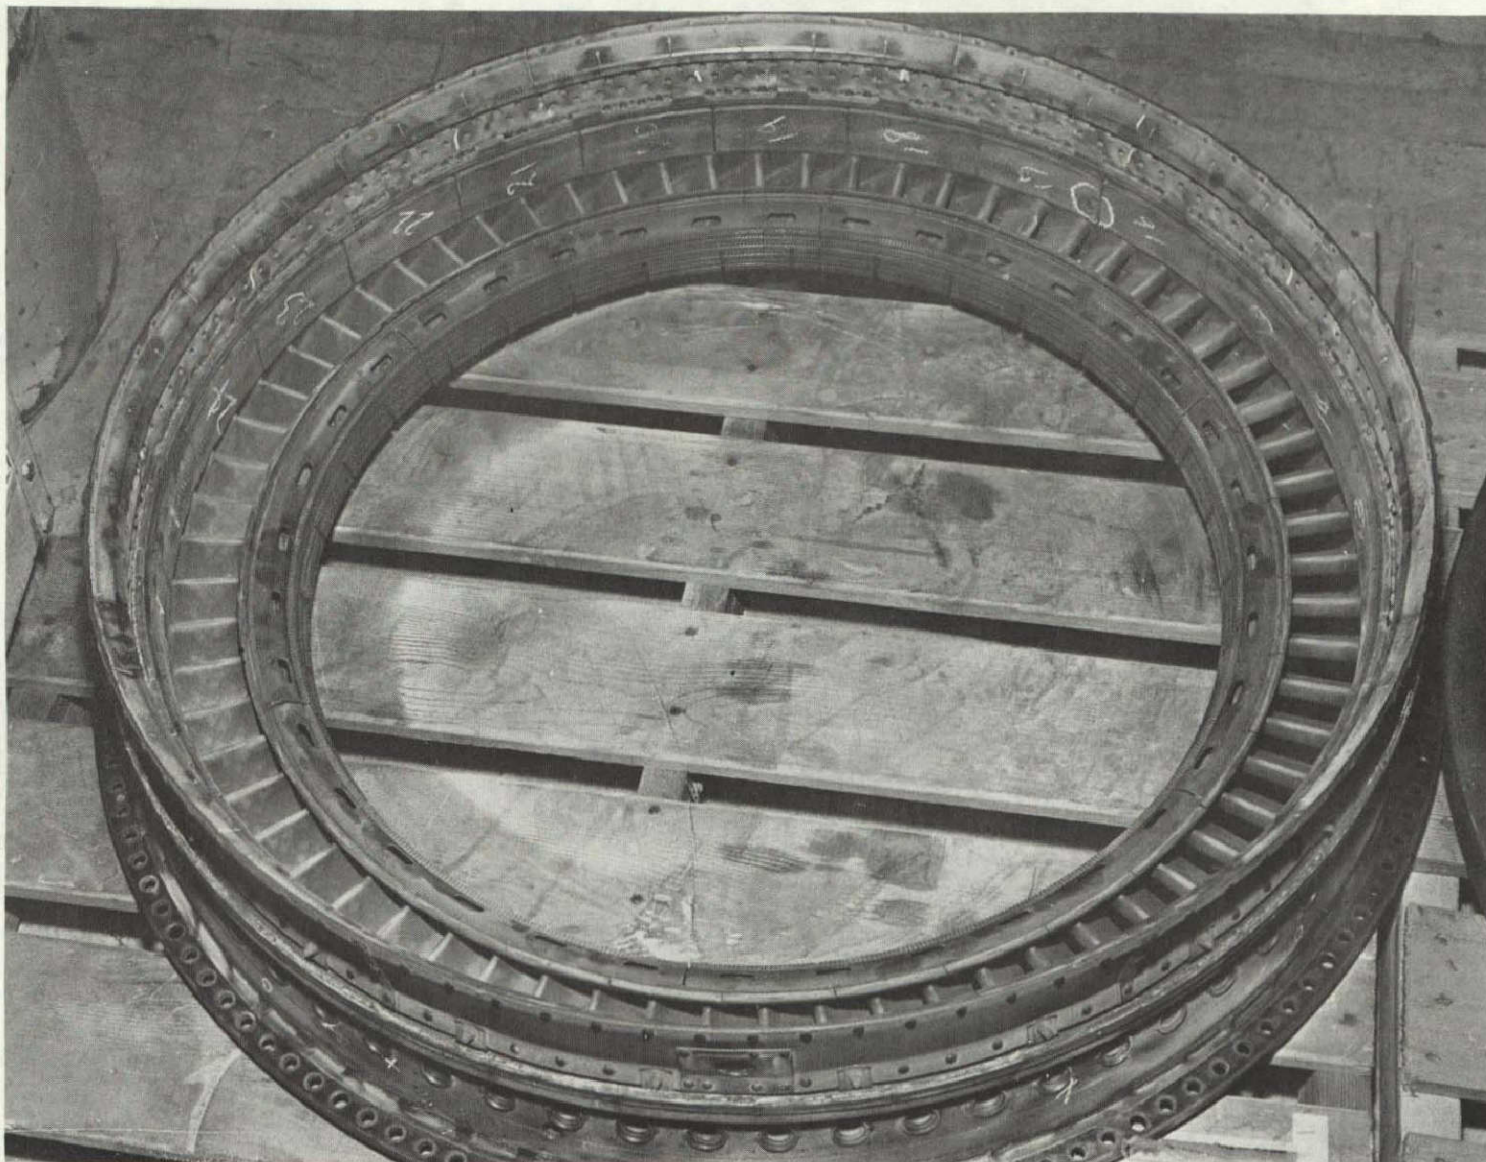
HP Turbine Nozzle Assembly, Overall View, Forward End.
